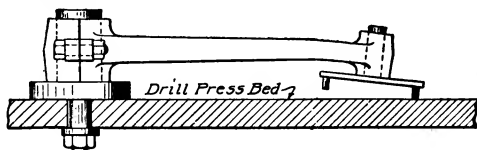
Method of Testing Connecting Rods with two Mandrels
